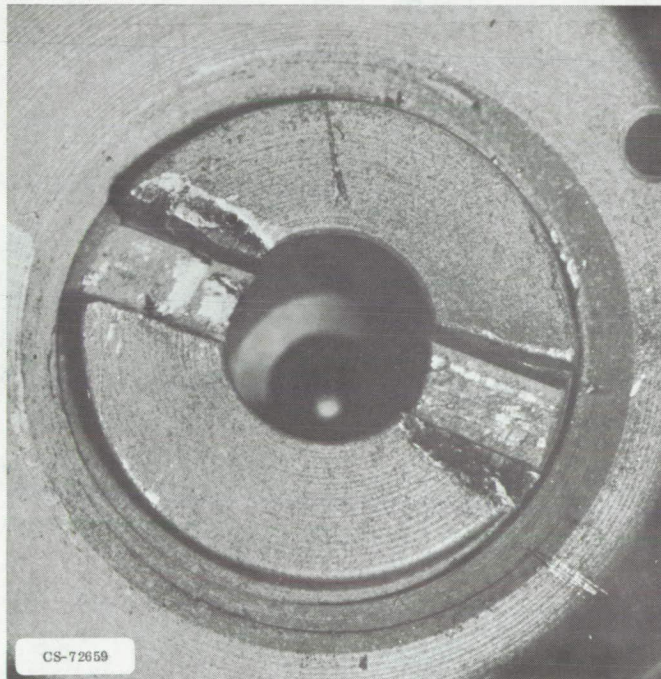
Screwdriver damage to solenoid-valve pilot seat retainer.
